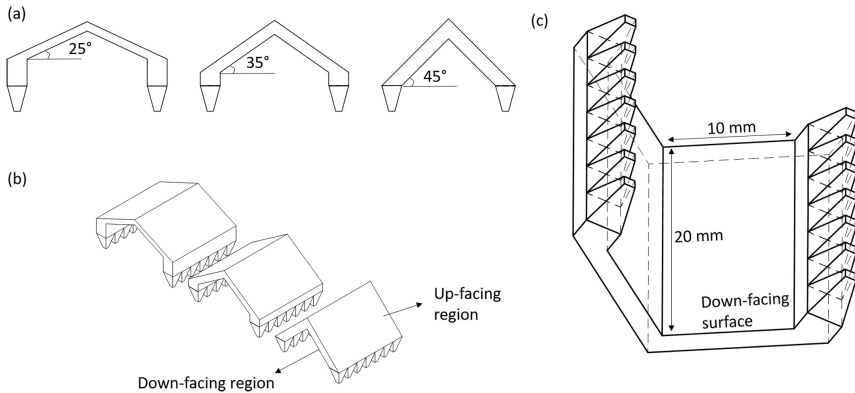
Sample for the evaluation of surface roughness of AM Crofer 22 APU, (a) Front view of manufactured test pieces showing all three printed angles 25°, 35° and 45°, (b) isometric view of printed test pieces and (c) view of down-facing surface of all test pieces (the schematic was reprinted with permission from Elsevier) [229].
